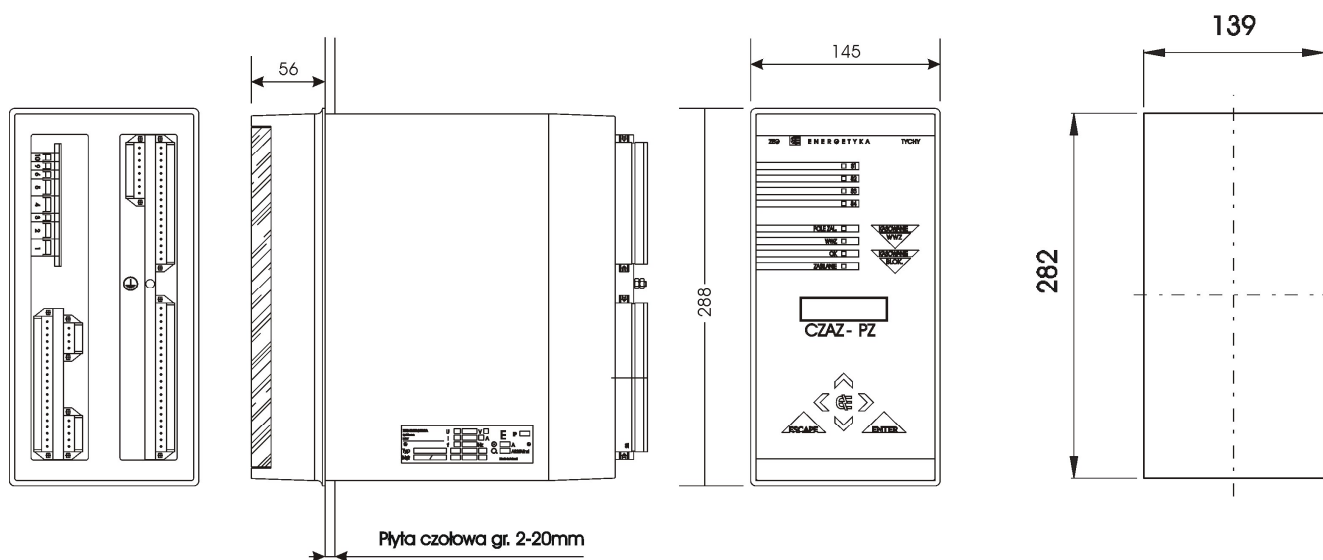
Front, rear and side view of flush-mounting case – dimension drawing
